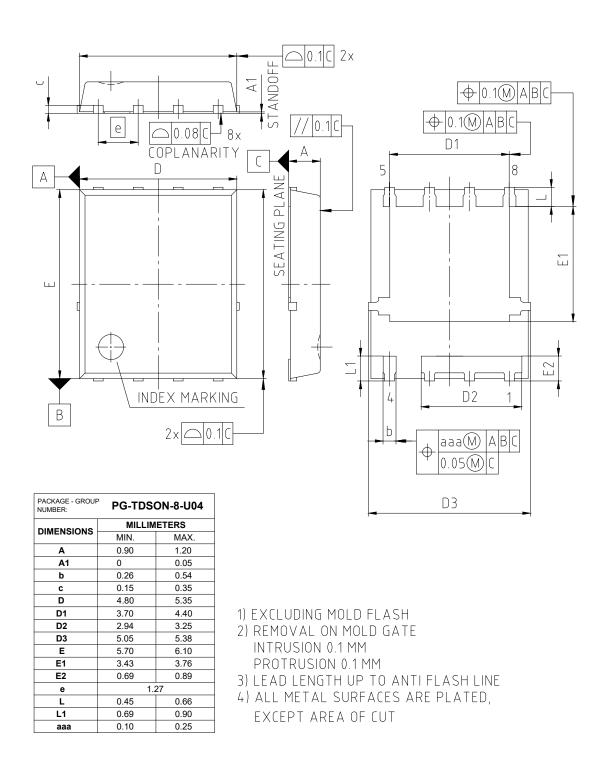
Outline PG-TDSON-8 FL, dimensions in mm
